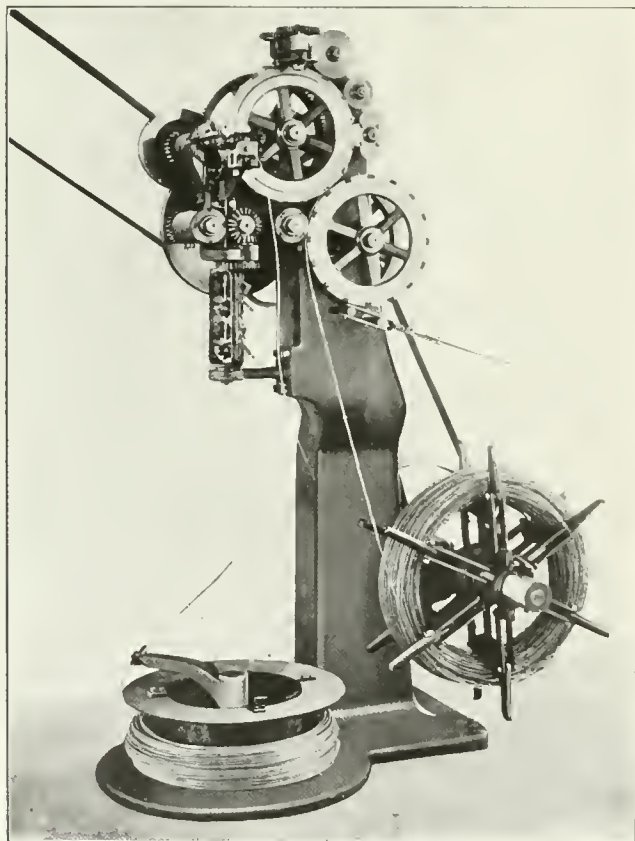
Rotary Single-strand High-speed Barbed-wire Machine
